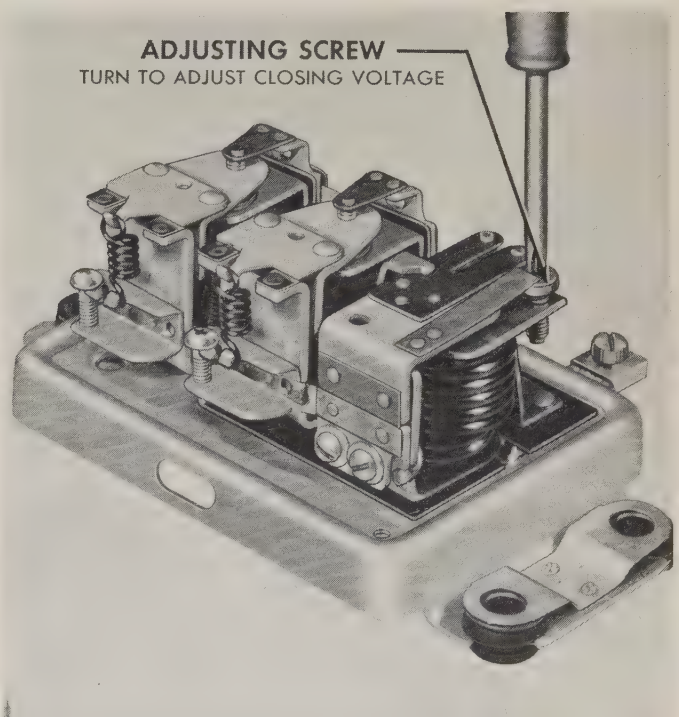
Cutout-relay closing-voltage adjustment on the type with a Phillips-head adjustment screw. (Delco-Remy Division of General Motors Corporation)
